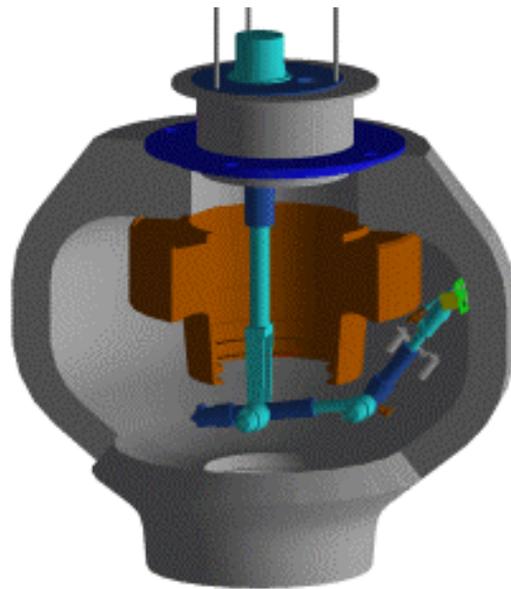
OASIS RCP robotic casing inspection system.
